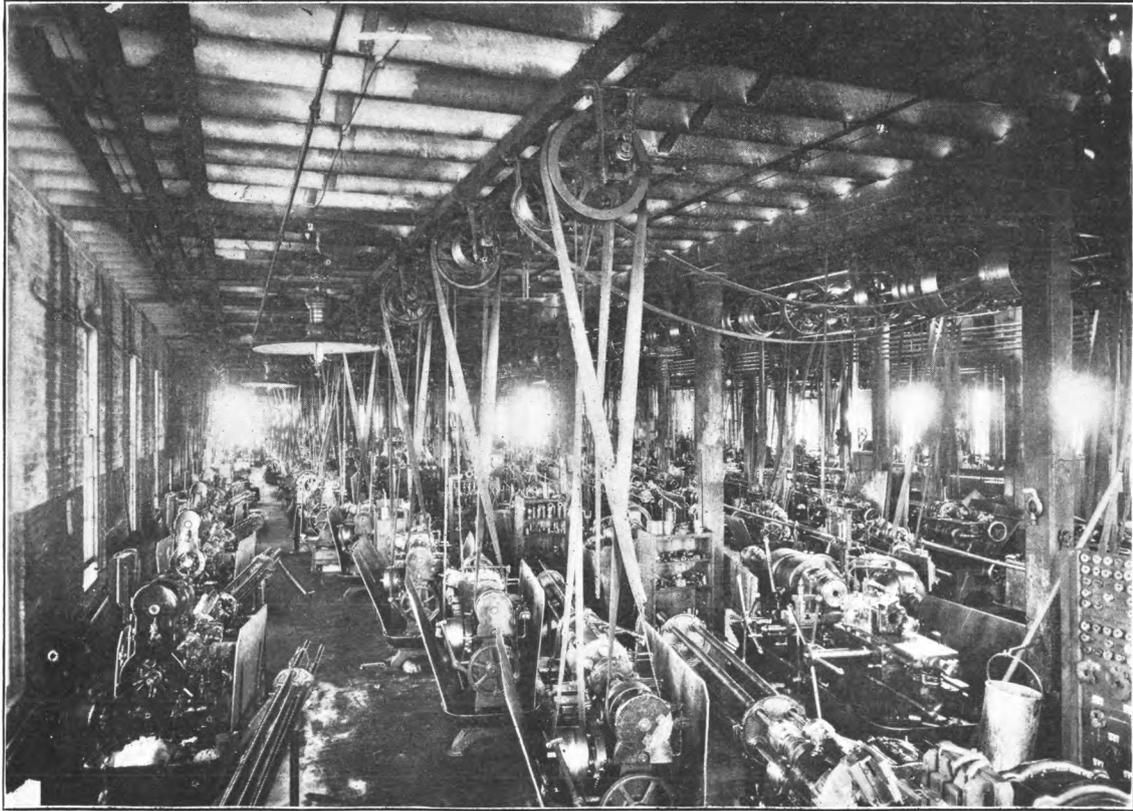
BELT-DRIVEN SCREW MACHINES.
